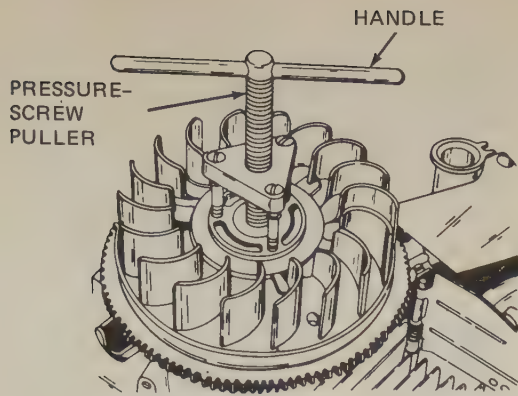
Using a screw-thread puller to remove the flywheel from the shaft. (Tecumseh Products Company)
